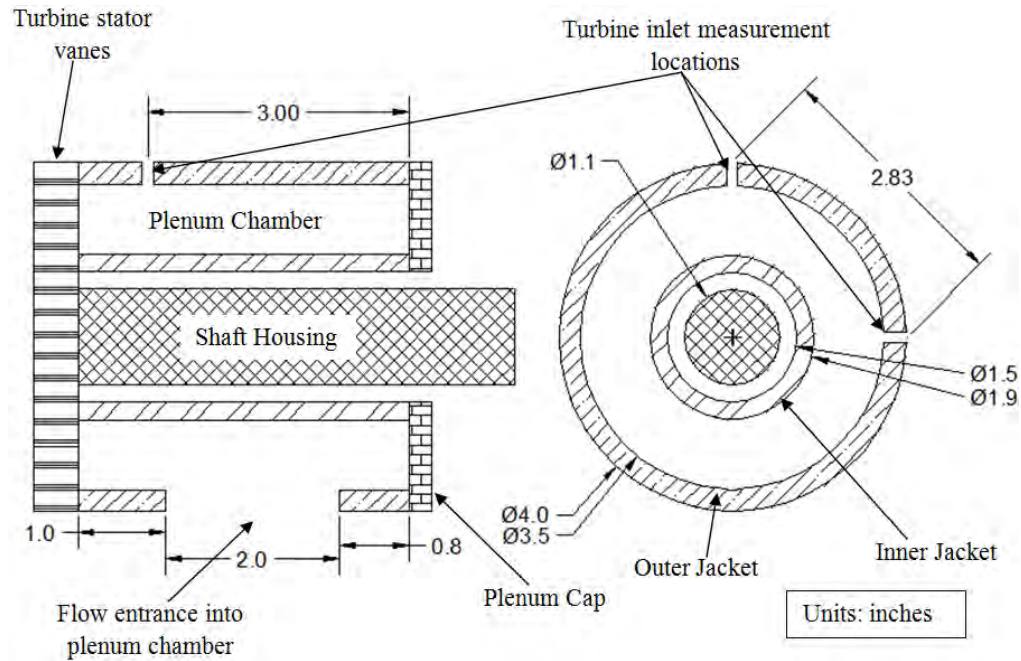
Schematic of plenum chamber showing dimensions and locations of turbine inlet measurements for turbine-RDE testing
